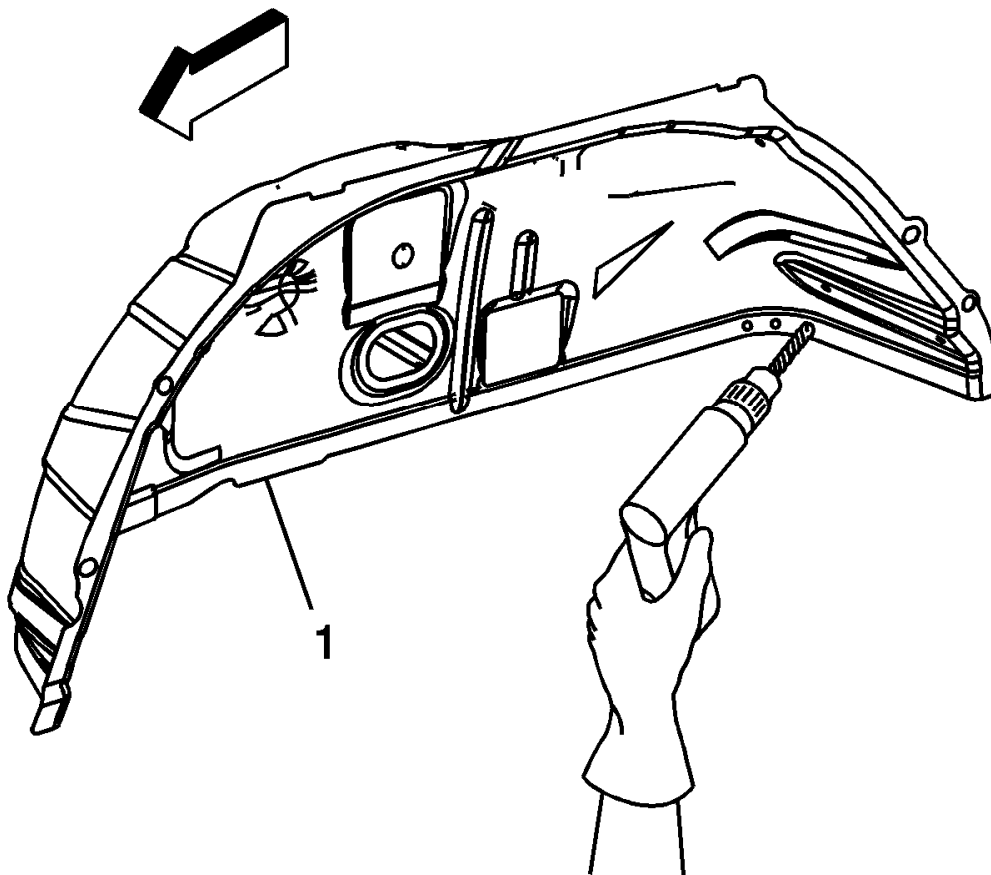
Drilling Plug Weld Holes In Replacement Rear Inner Wheelhouse
